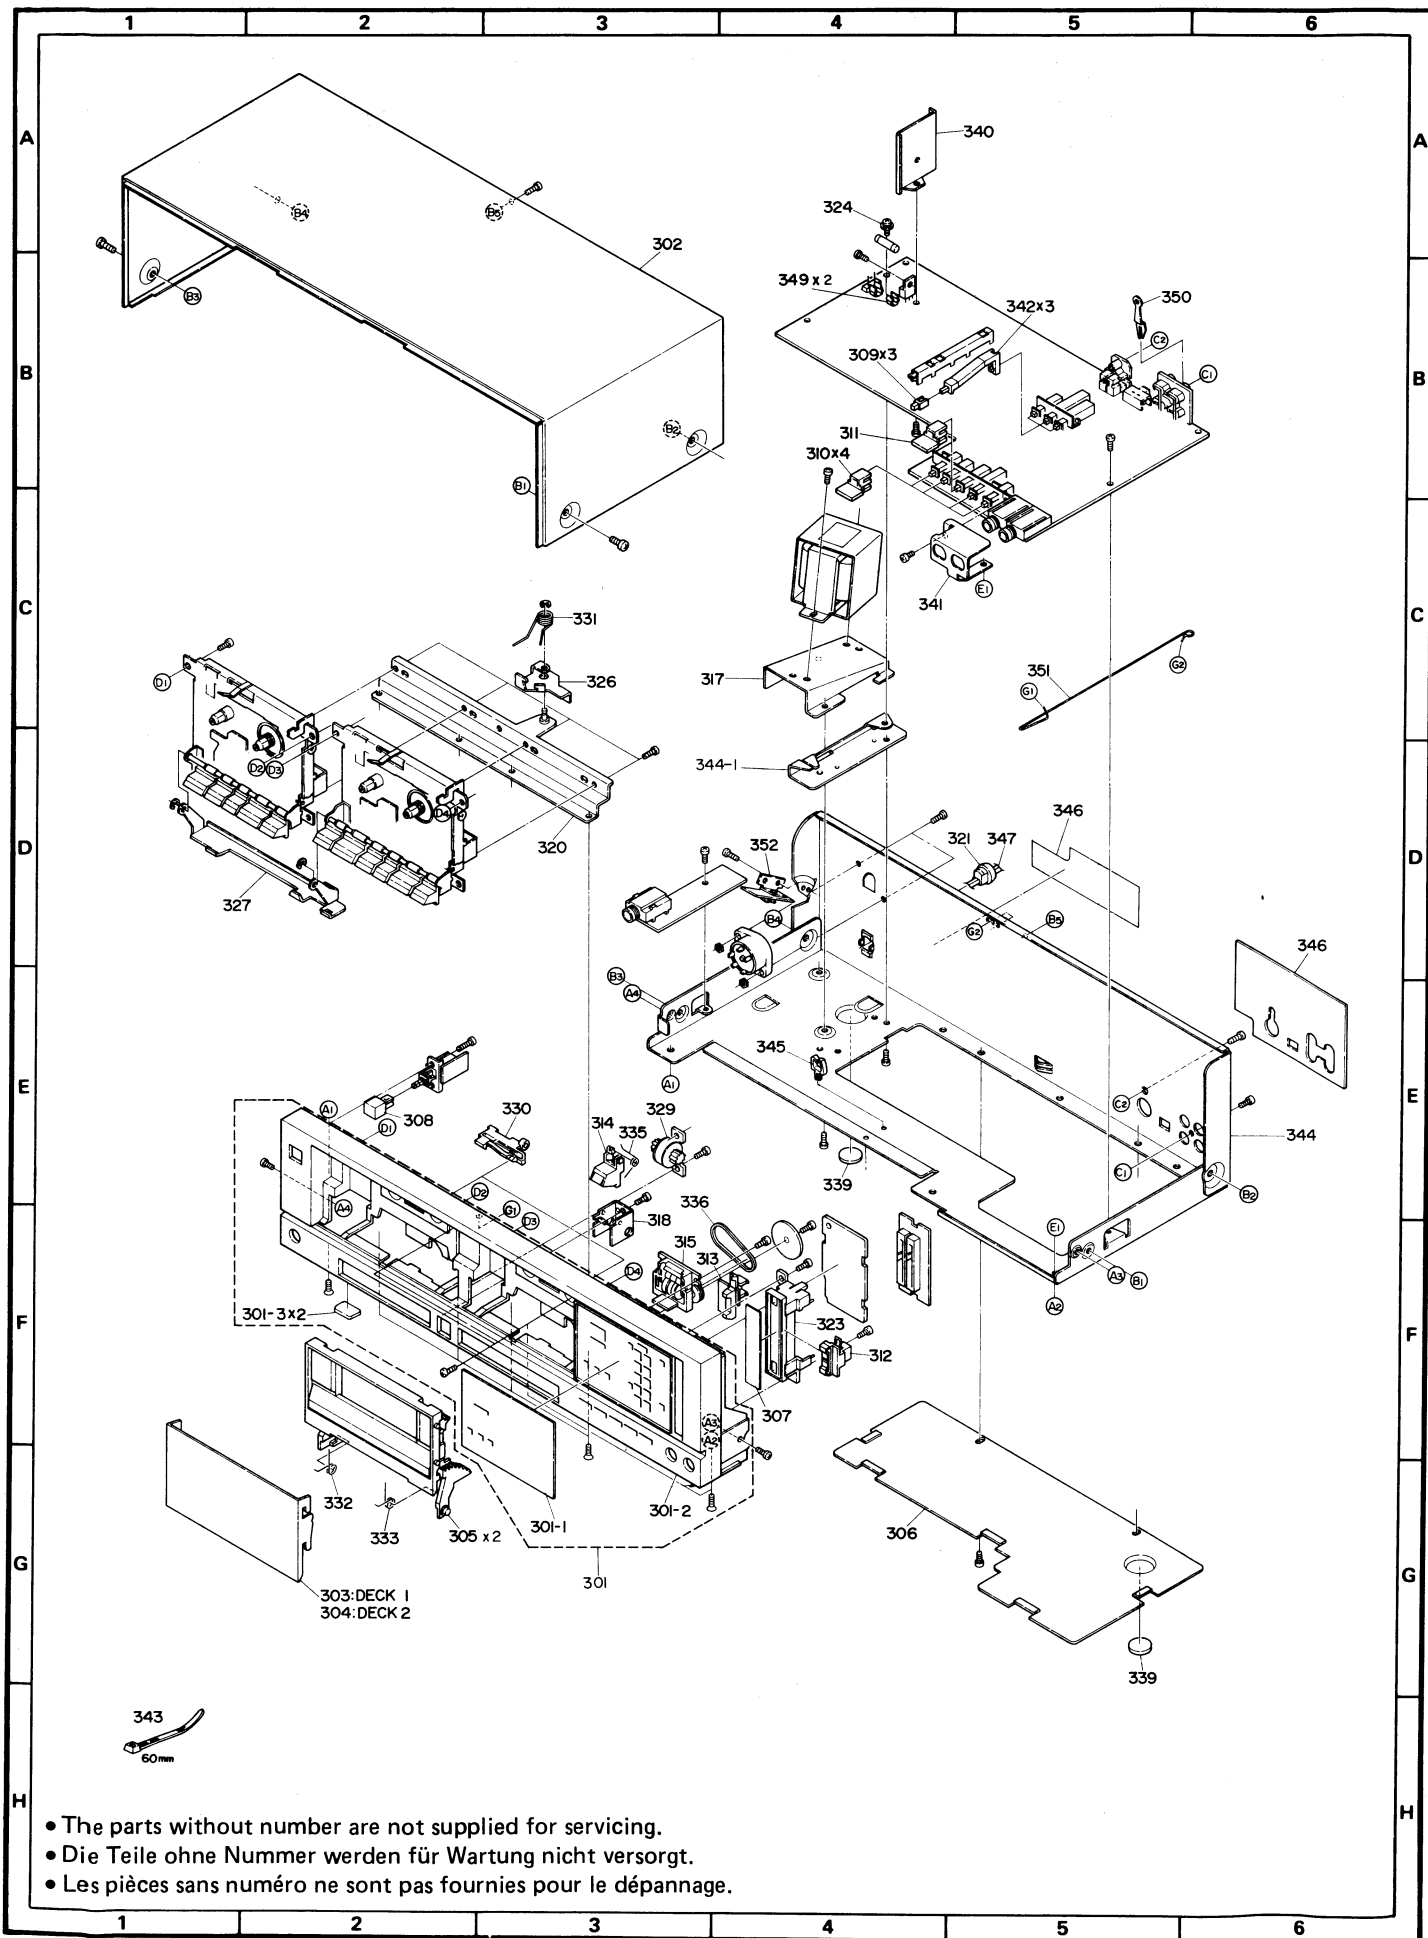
MECHANISM EXPLODED VIEW (1/2)
